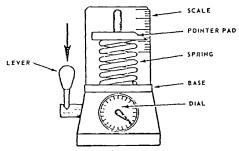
A. Testing valve spring tension. Spring is placed on base. When lever is pulled down, pointer pad compresses spring to specified distance on the scale. Tension, in pounds, is then read on the dial.
